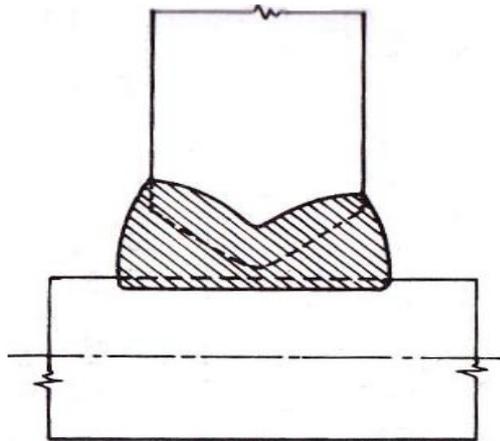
Square T joint (The Welding Master 2017).
